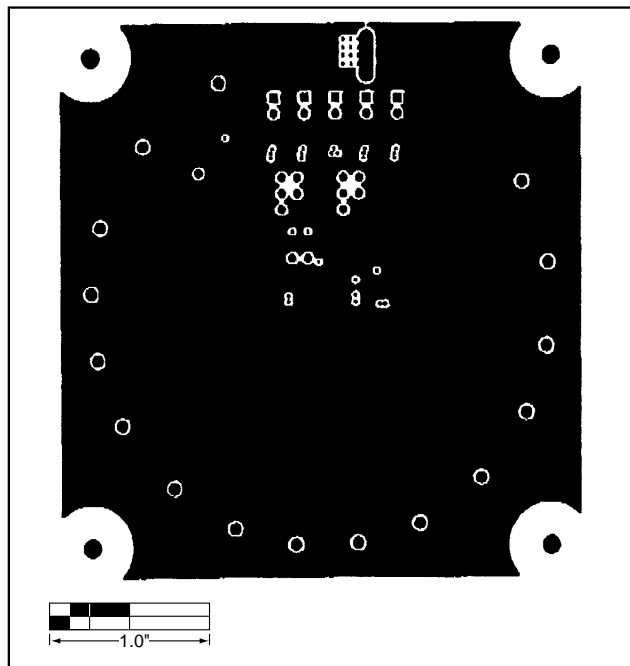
MAX3693 EV Kit PC Board Layout—GND Plane
